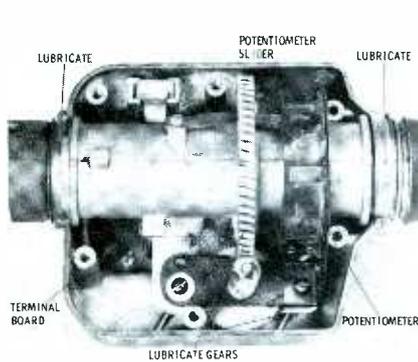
This rotor mechanism has been cleaned and is ready for relubrication.
